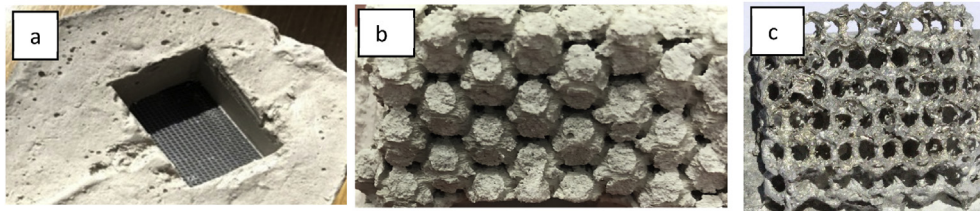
(a) plaster mold with PLA model inside after solidification. – (b) plaster mold without PLA model inside after burnout of PLA. (c) Aluminum foam with open porosity after casting at the end of the process.
